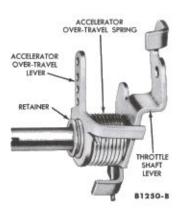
Accelerator Over-Travel Spring and Lever Installation
